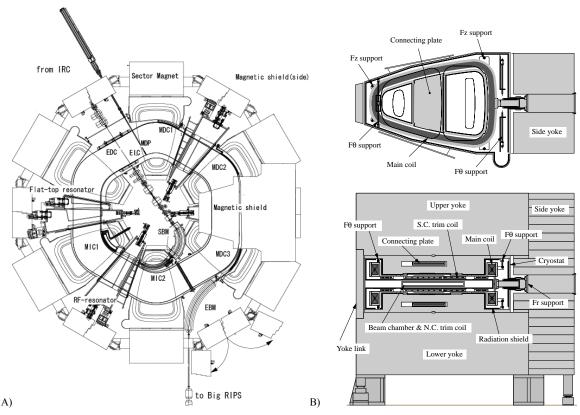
A) A plan view of the SRC. B) Cross-section and plan views of the sector magnets.
